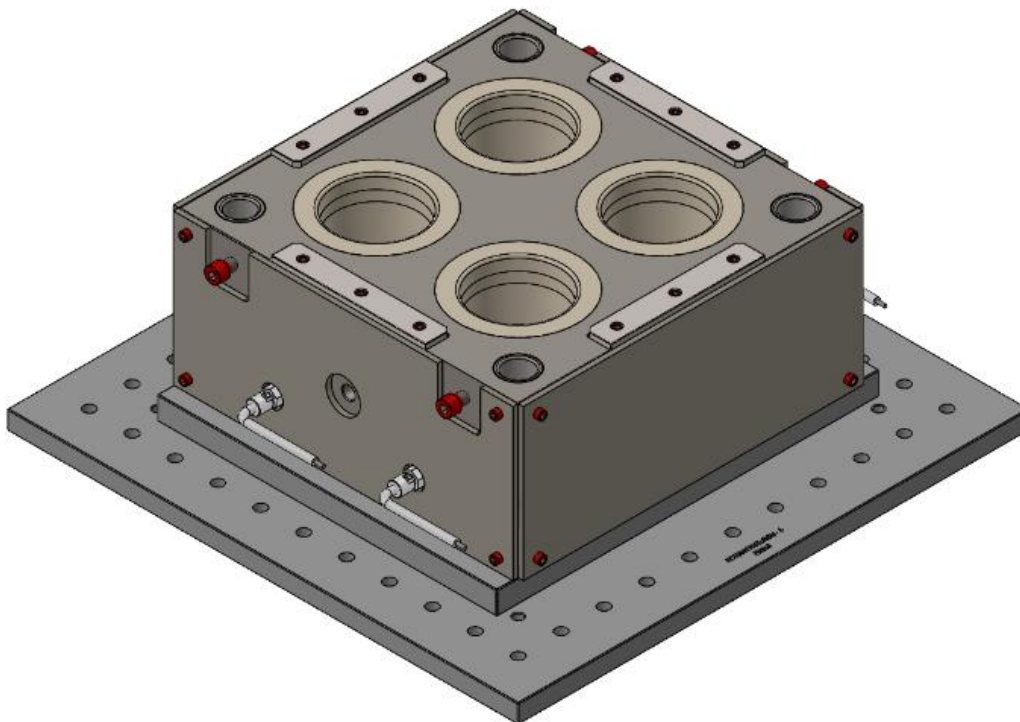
Bottom half of the tool, with thermocouples bolted into the bolster plate.
